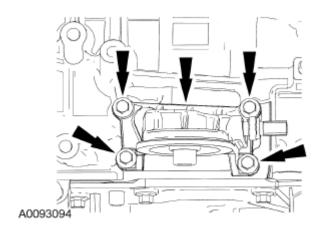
Locating Bolt And Capacitor Courtesy of FORD MOTOR CO.
